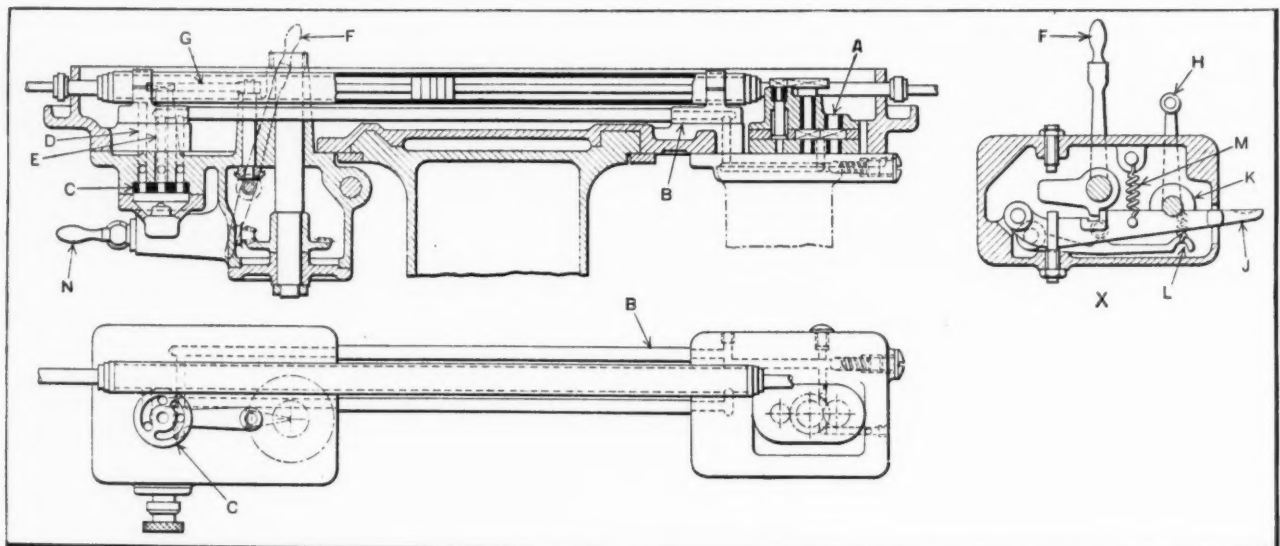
Hydraulic Pump and Control Unit Incorporated in Machine Saddle
